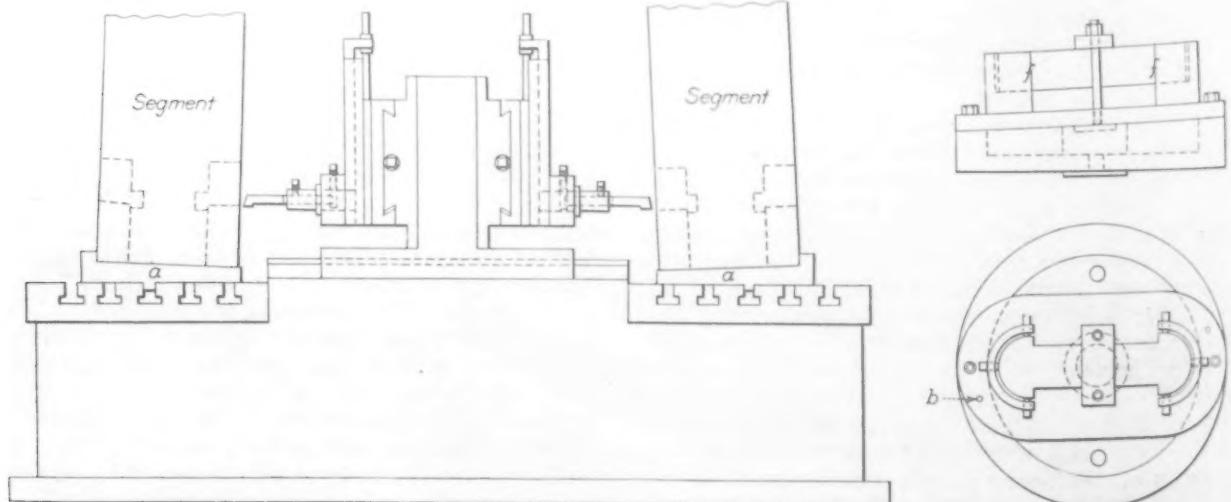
Method of Mounting the Segments on a Shaping Machine
